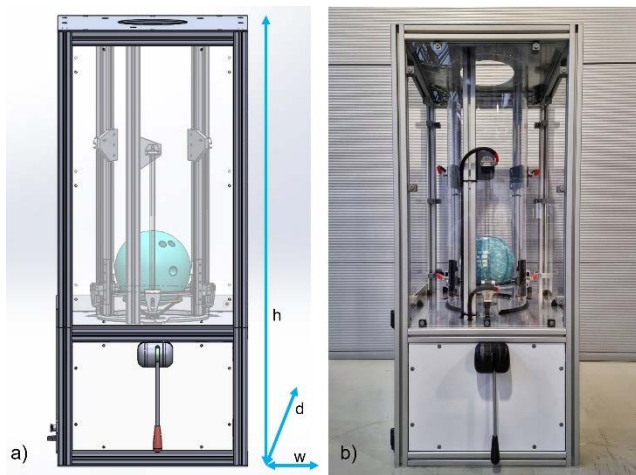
a) Image of the CAD assembly, b) Final fully assembled and enclosed demonstrator (height $h = 1260$ mm, width $w = 545$ mm, depth $d = 545$ mm) with top kinematic chamber and bottom electronics chamber.
